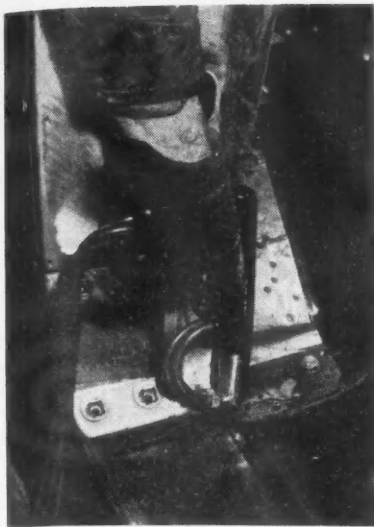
A welder at Briggs Manufacturing Co. uses a lightweight gun for poke spot welding the front body pillar reinforcement to the floor pan. The spot weld to the right of the gun has been completed.
